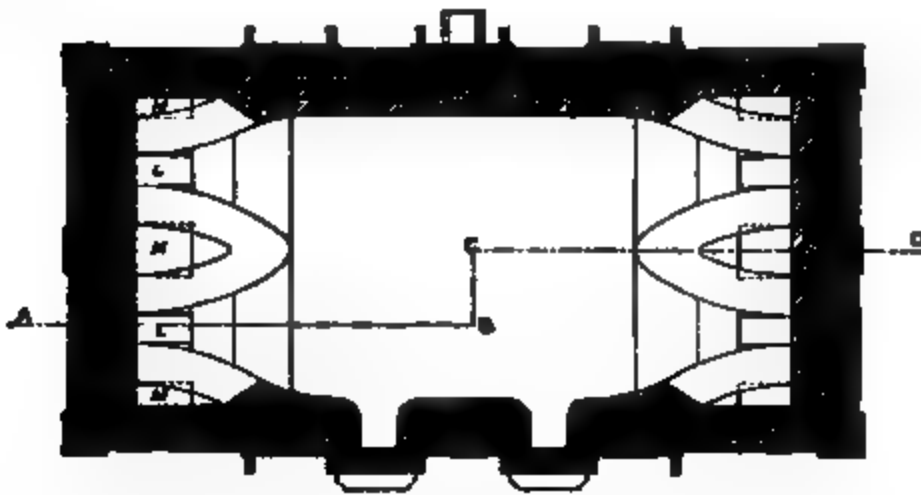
Siemens' Re-heating Furnace ; sectional plan on L, M.
